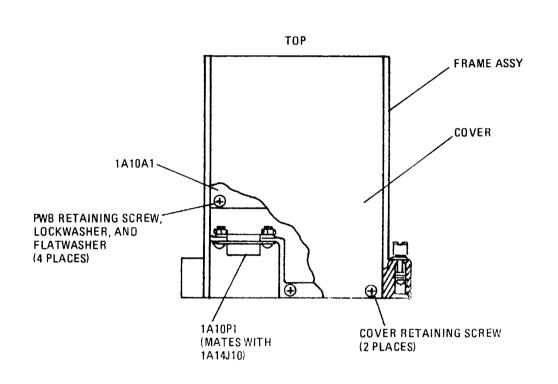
Tune Detector Module Assembly 1A10, PN 755017A4800 (Sheet 1 of 2)
